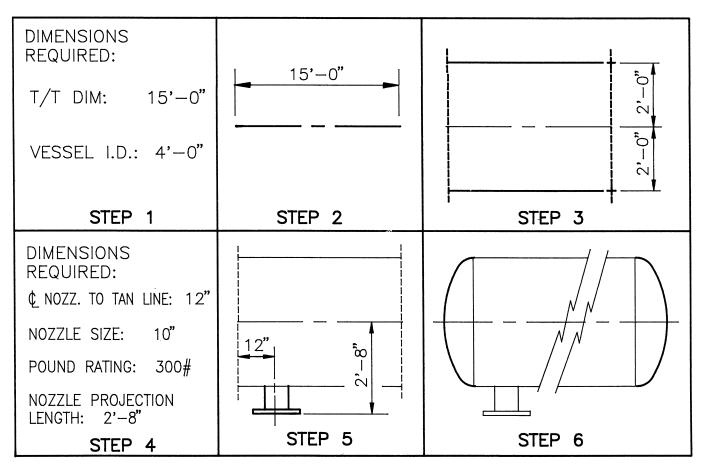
Steps for drawing the plan and elevation views of a horizontal vessel.
